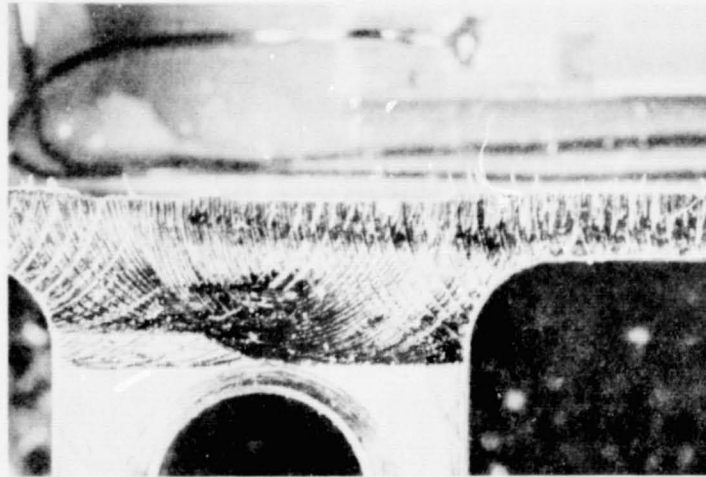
Visual Verification of Weld Splatter After Lid Removal
